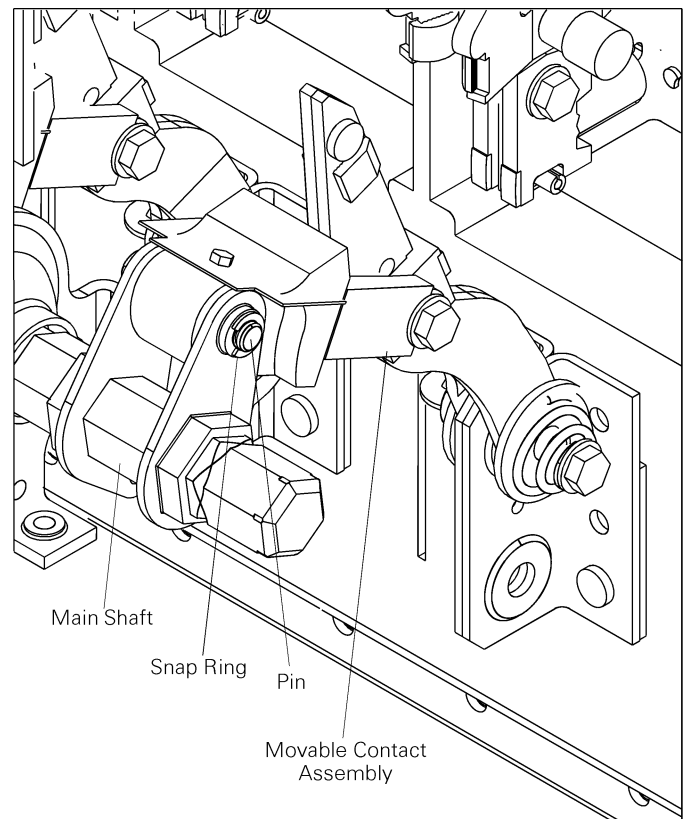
Movable contact connection to the breaker main shaft on EGS08, EGF08, and EGH08 breakers.
